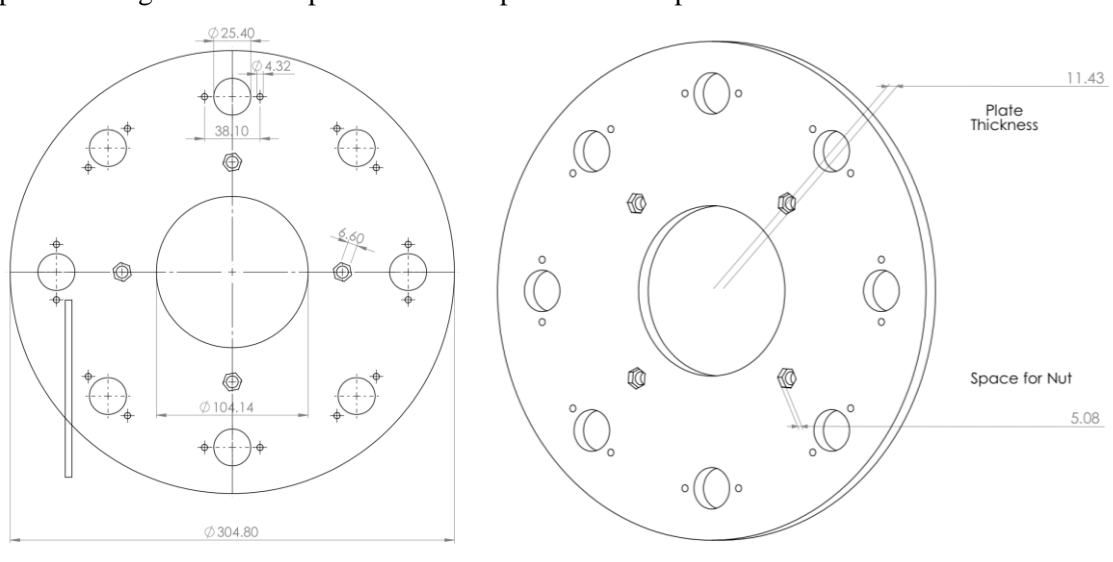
CAD drawing of the bottom of the laser holder with dimensions. Dimensions in diagrams are in millimeter.
